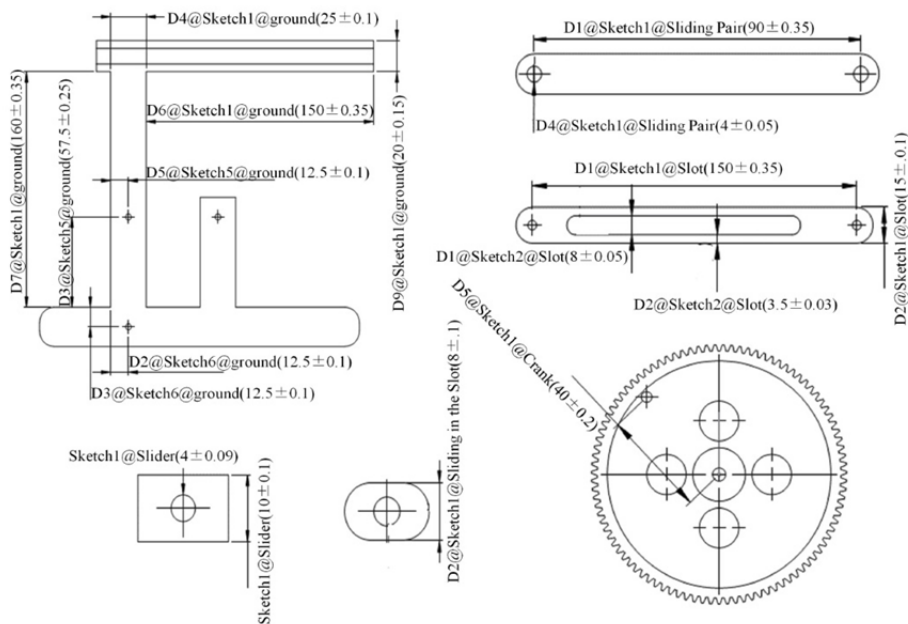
Dimensions and tolerances quick return mechanism(dimensions and tolerances in mm)
